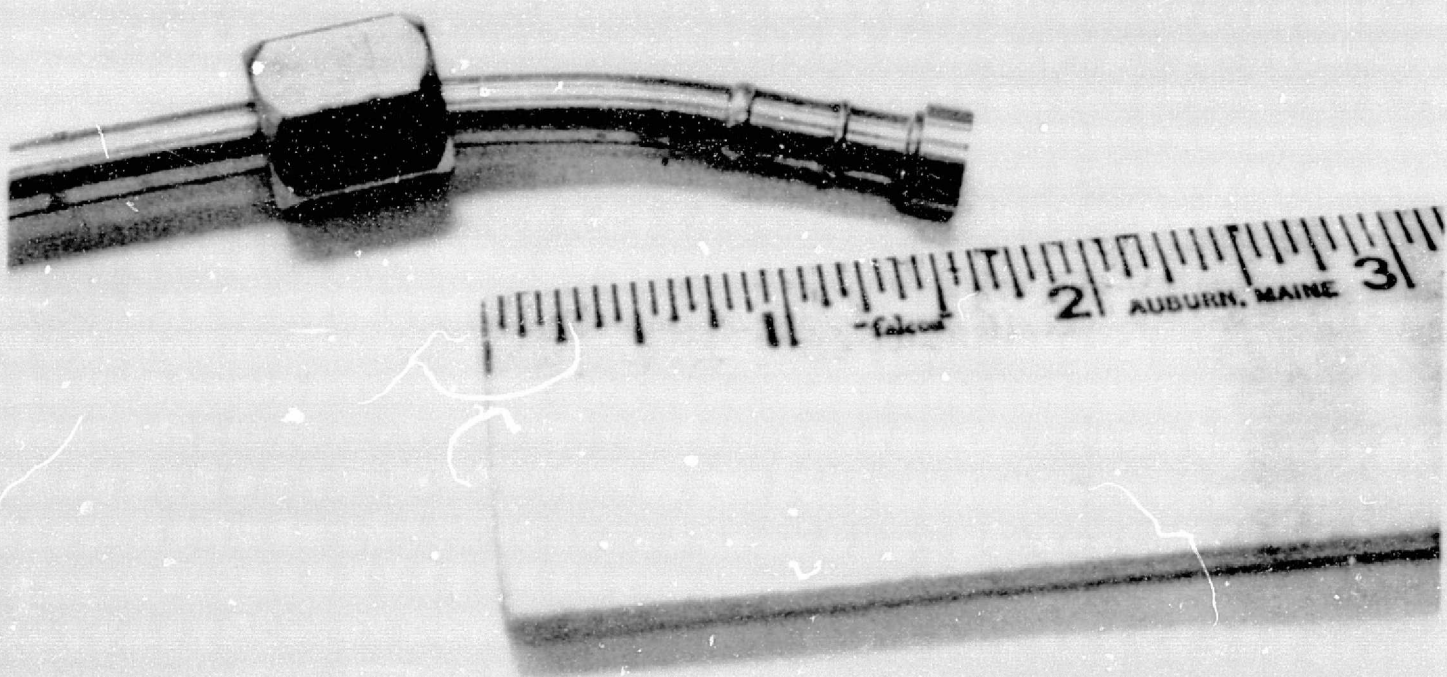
Close-up View of the Weld in 1/4 Inch Size Tubing
